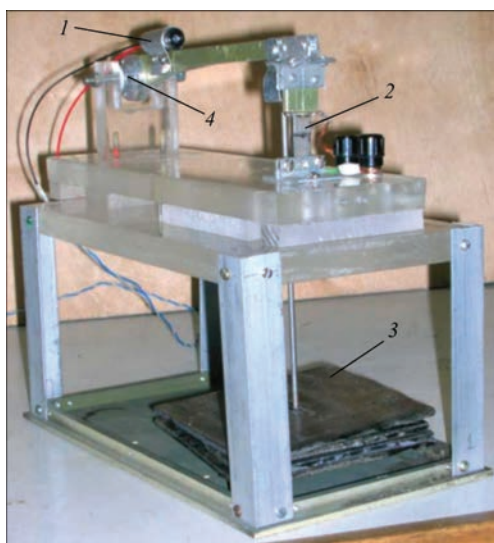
Laboratory welding unit: 1 — laser sensor of electrode movement; 2 — electrodes; 3 — weights; 4 — lever axis
